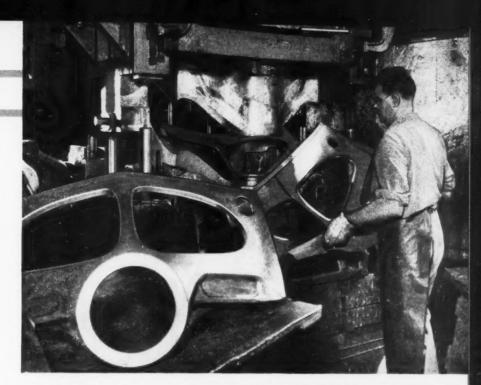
Flat blanks for the one-piece rear fenders are pre-formed by hand, one end being bent upward before the blank is placed in the drawing die
